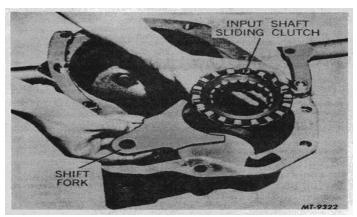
Removing Sliding Clutch and Shift Fork and Push Rod Assembly
